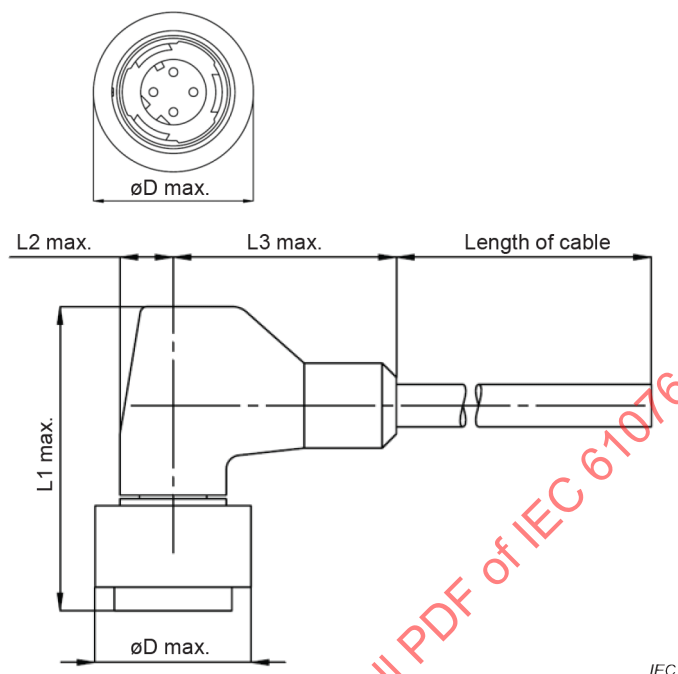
Style NF_PPI_PPO – Non-rewirable connector, female contacts, right angled higher version, with inner and outer push-pull locking
